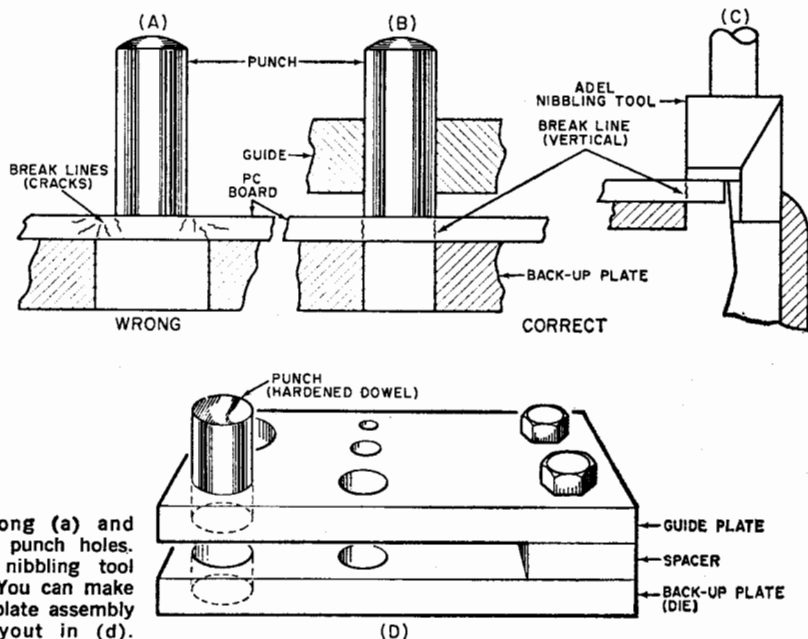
The wrong (a) and right (b) way to punch holes. Operation of a nibbling tool is shown in (c). You can make your own punch plate assembly by following layout in (d).
